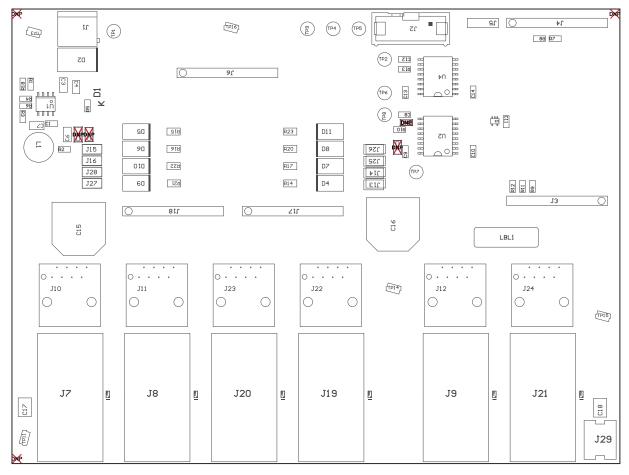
TPS2388EVM-612 (Motherboard) Top Side Assembly
